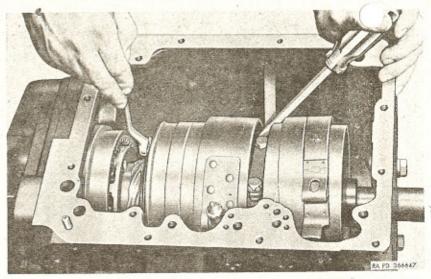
Removing or installing reverse center gear flange bolts (301MG).
